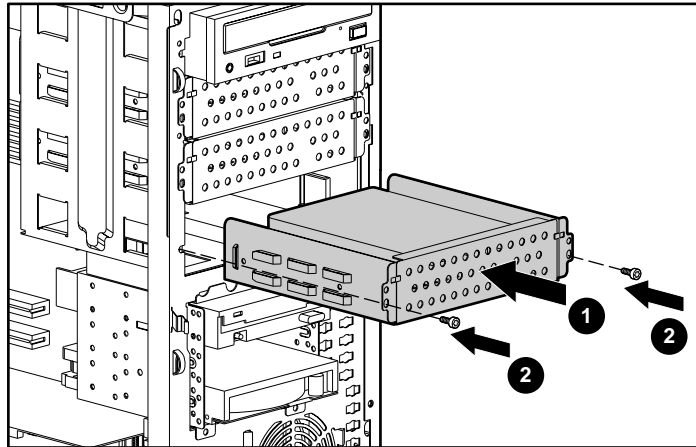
Installing a device into a 5.25-inch drive bay.
